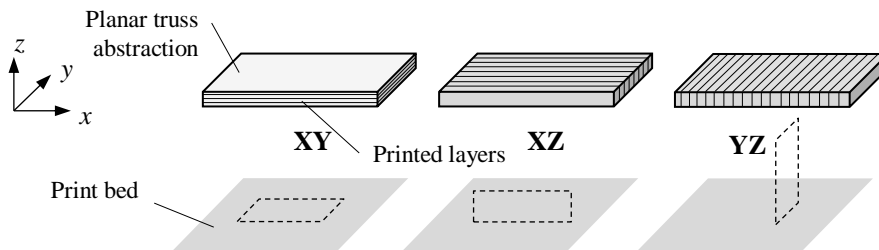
Three orientations for printing the planar truss (abstracted as a rectangle) prototype monolithically.
